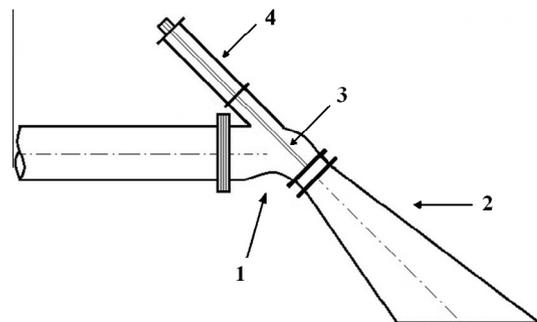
Schematic view of Agnew turbine: (1) casing, (2) draft tube, (3) main shaft and (4) bearings housing.
